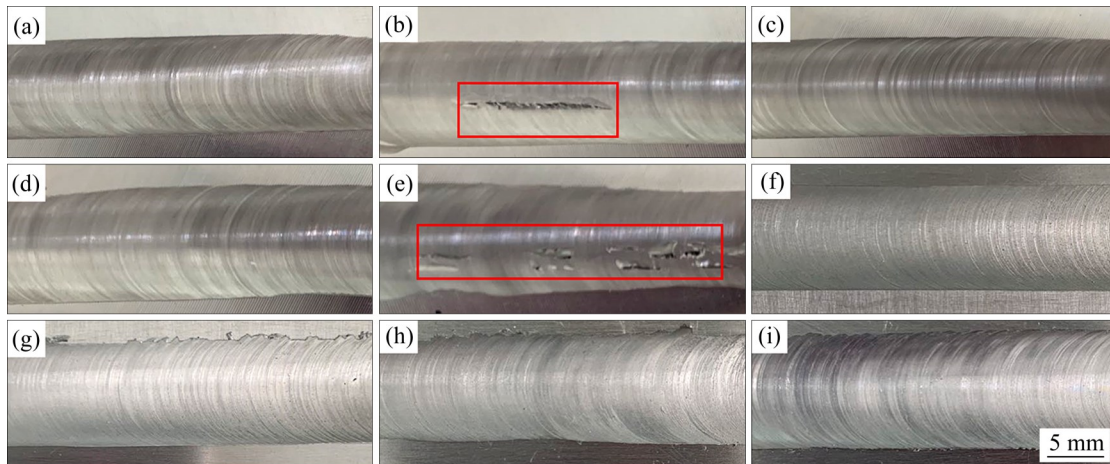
Macroscopic features of friction stir welding joints using different welding parameters: (a–h) Samples 1–9 in Table 1
